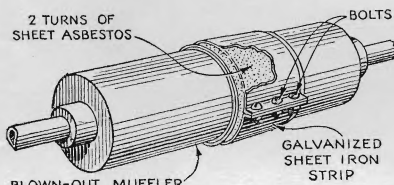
Sheets of asbestos and galvanized iron give a lasting patch for blown-out muffler
